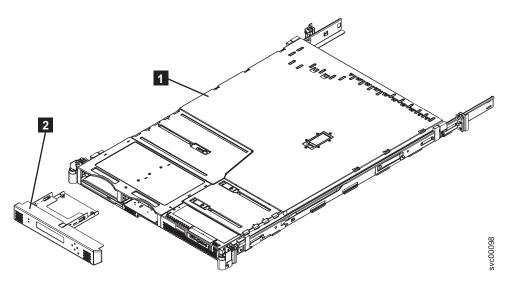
The SAN Volume Controller 2145-8F2 frame assembly and service controller
